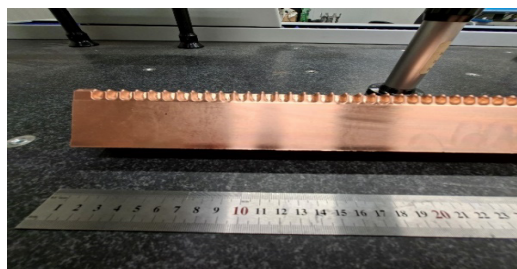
Close-up of one quadrant after machining. The single cells are visible.
